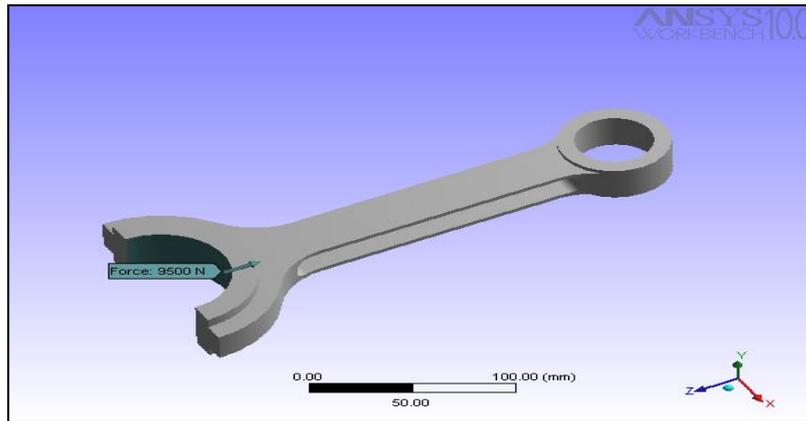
A sinusoidal distributed loading under tensile loading on H section connecting rod
